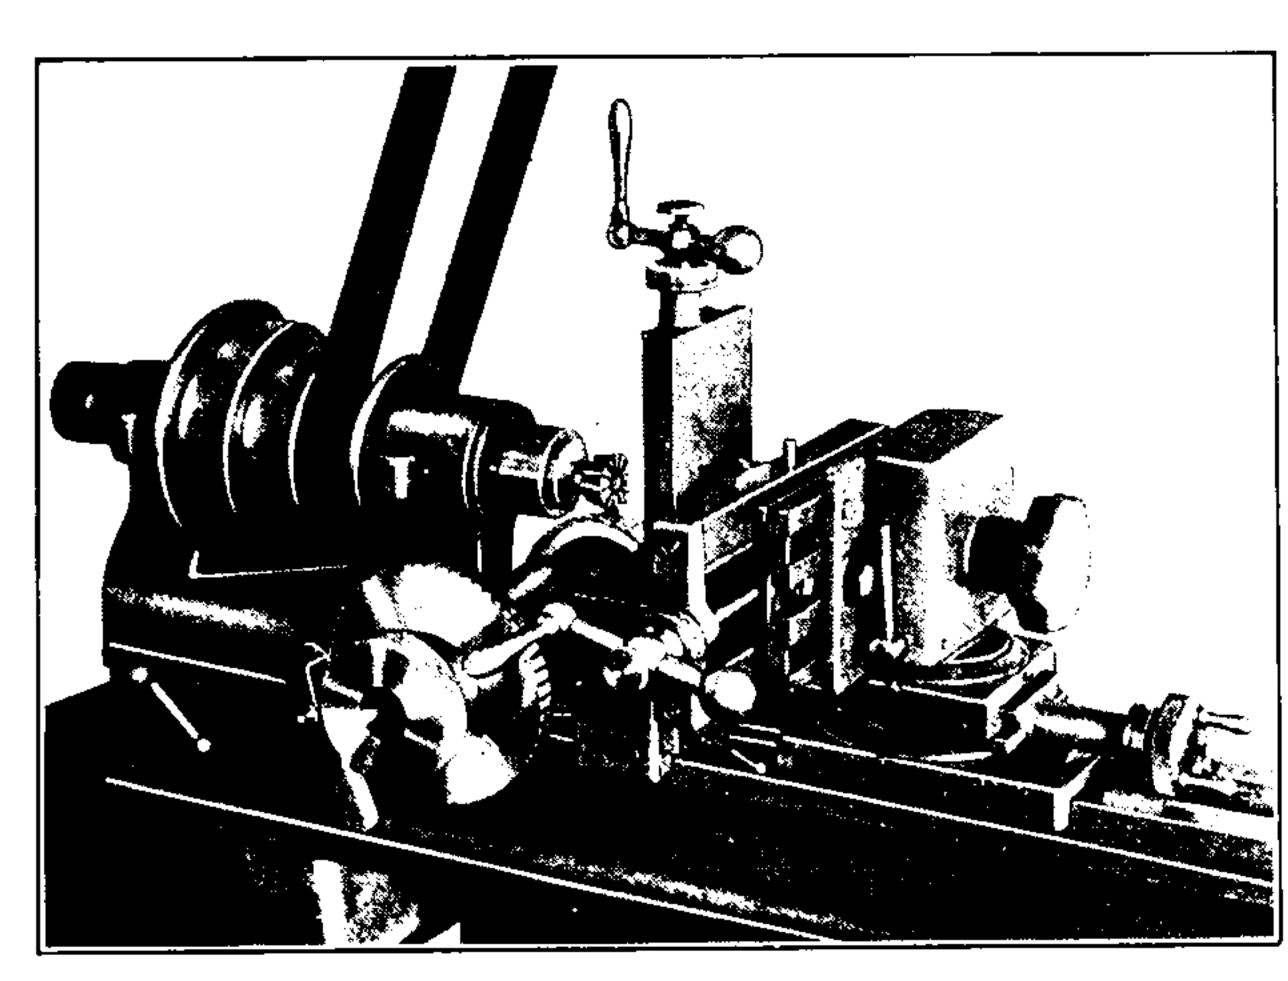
Tail end view of Milling Attachment set to mill teeth in a Milling Cutter
